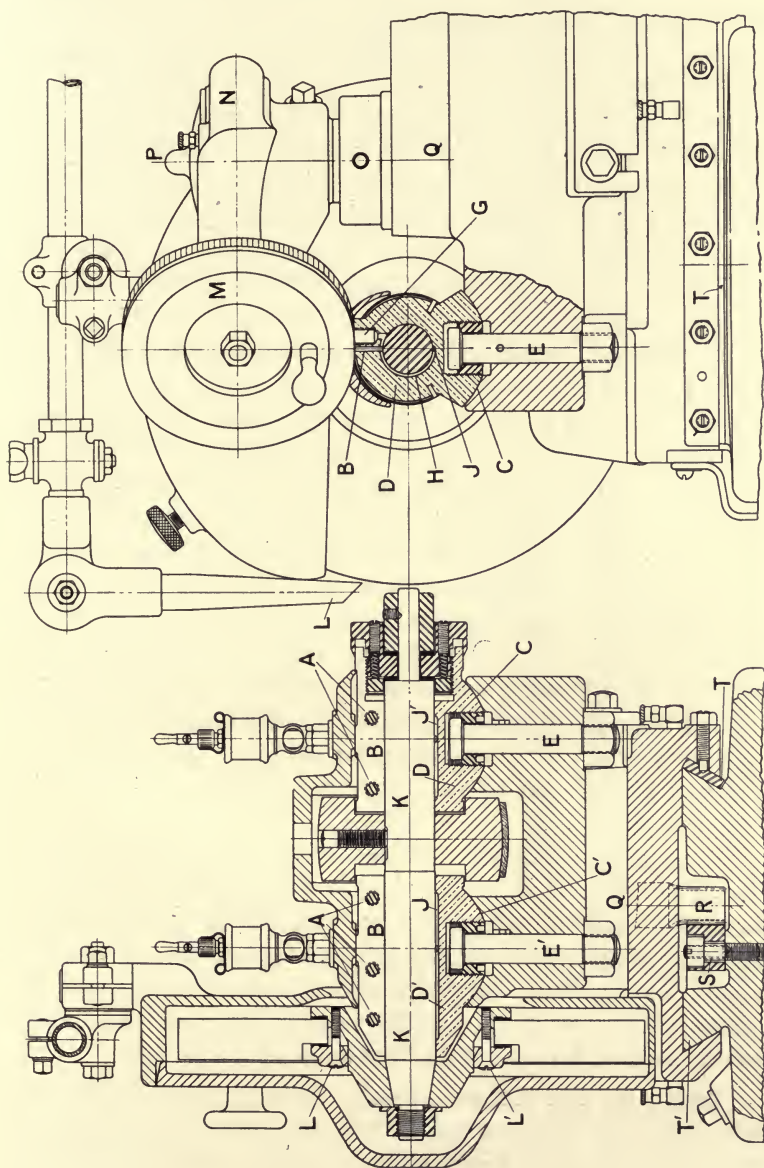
LANDIS WHEEL HEAD (UNIVERSAL)
